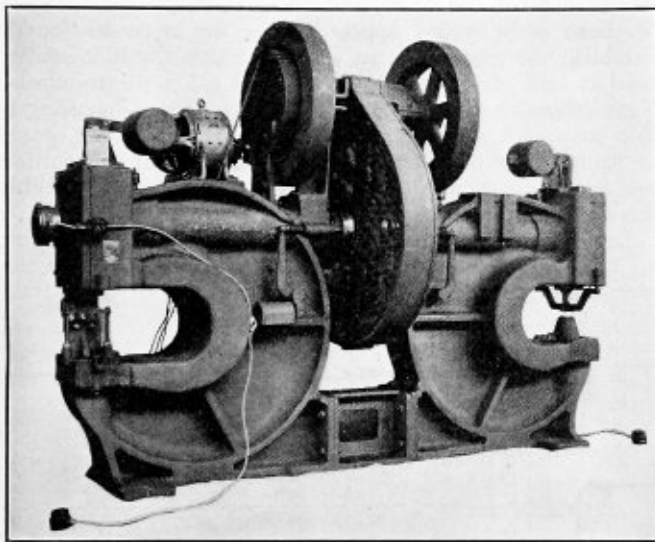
Double End Motor Driven Punching and Shearing Machines Arranged with Electrical Control
